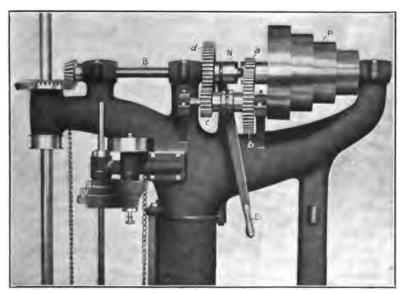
Back-gearing and Feed Change-gears of Upright Drilling Machine
